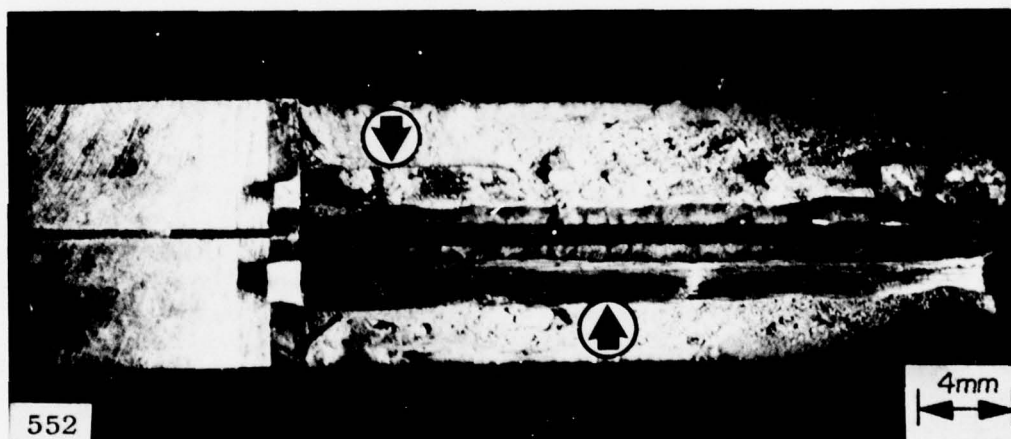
Arrows show cold shuts (incomplete fusion) in fracture of two-ply HY-130 EB weld joint DT specimen. Each ply is 6.35 mm thick. Not preheated.
